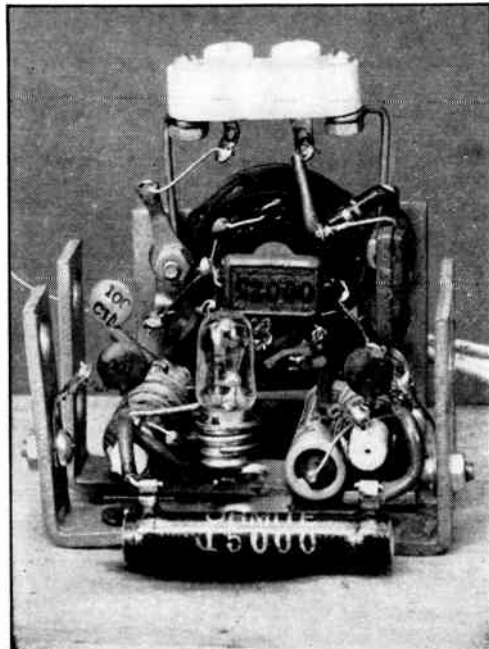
The Novice transmitter just before mounting the variable condensers and coil. All wiring is complete except for connecting one side of C_7 .
